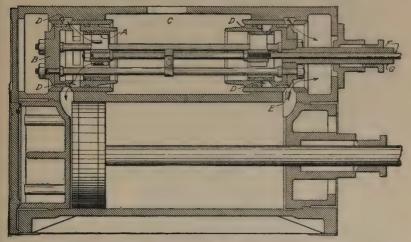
Section of Cylinder and Valve-Gear Mechanism of Thompson Automatic Valve Gear
